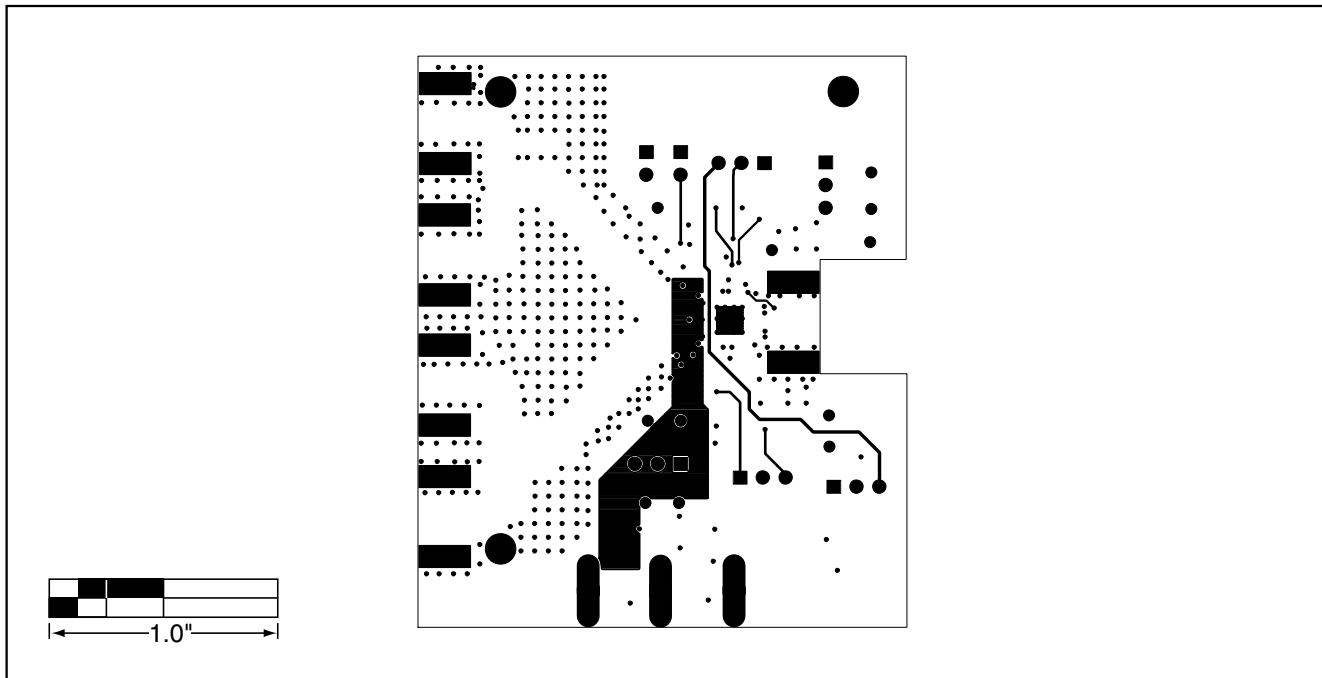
MAX3935 EV Kit PC Board Layout—Solder Side
